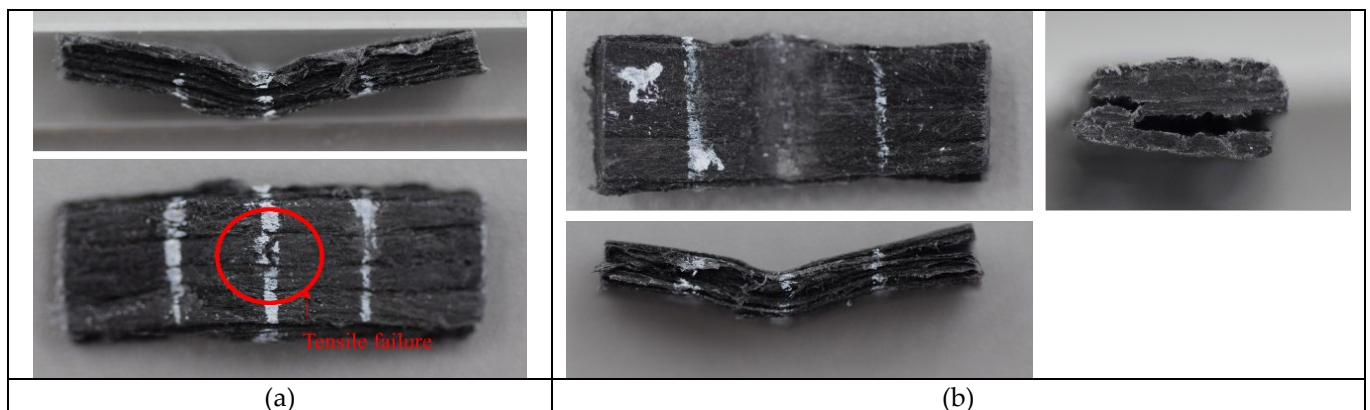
As-printed SBS failure sample: (a) tensile fracture on bottom side; (b) inelastic deformation with side layer separation.
